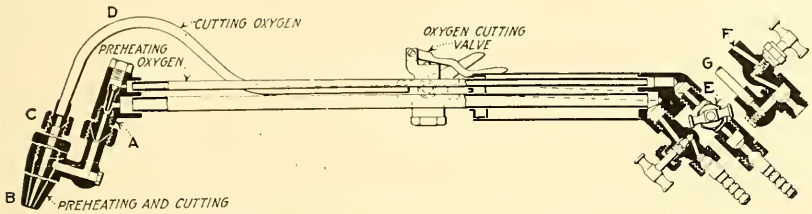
Airo-Vulcan Combination Cutting and Welding Torch.
